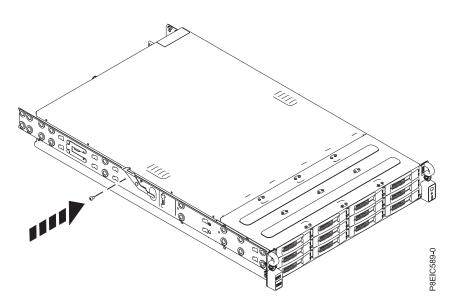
Attaching the chassis rail retention screw to the chassis on the left side of the system
